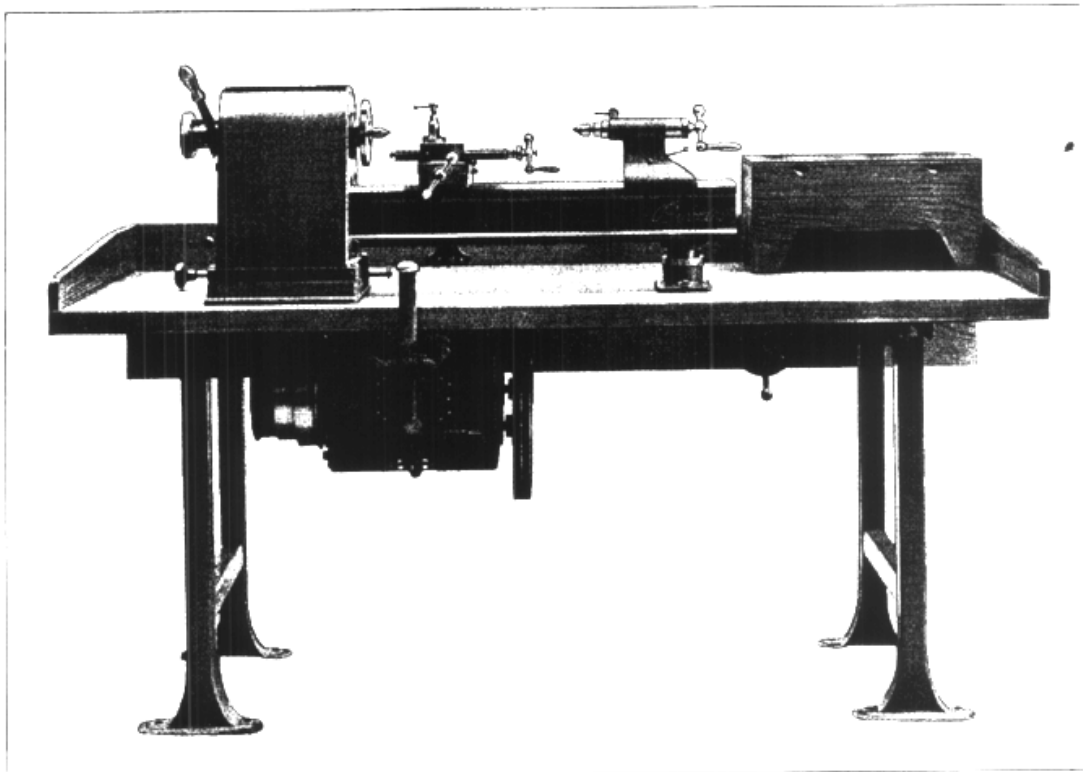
Rivett Series 505 lathe, enclosed head type, with Jack Pedestals on unit bench with Speed Box Motor Drive, hand lever control
